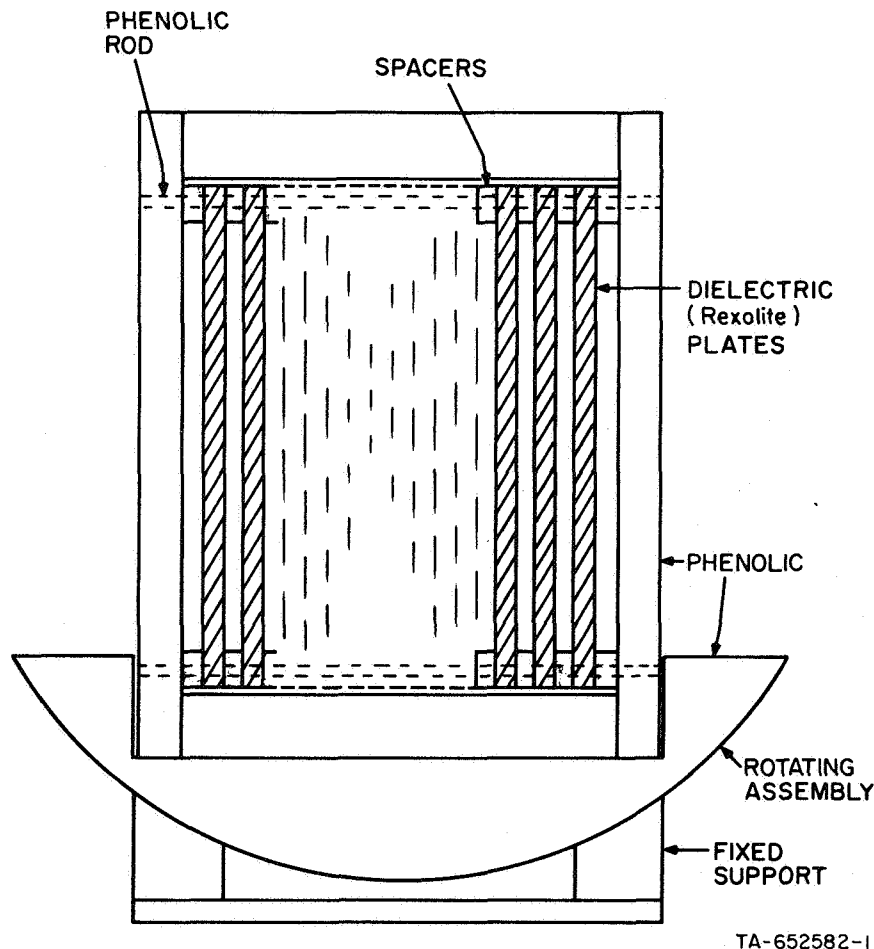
FRONT VIEW OF A HALF-WAVE PLATE ASSEMBLY
